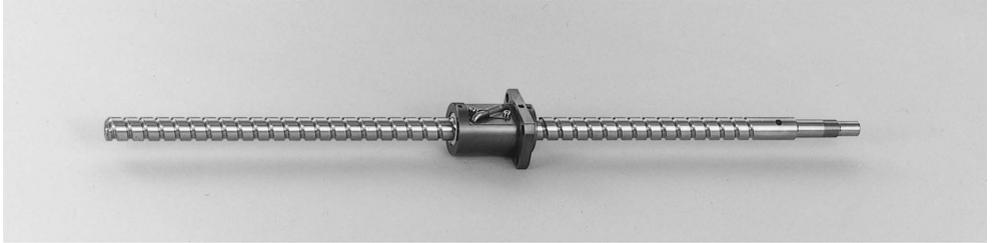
Finished shaft end VFA type for transfer equipment
